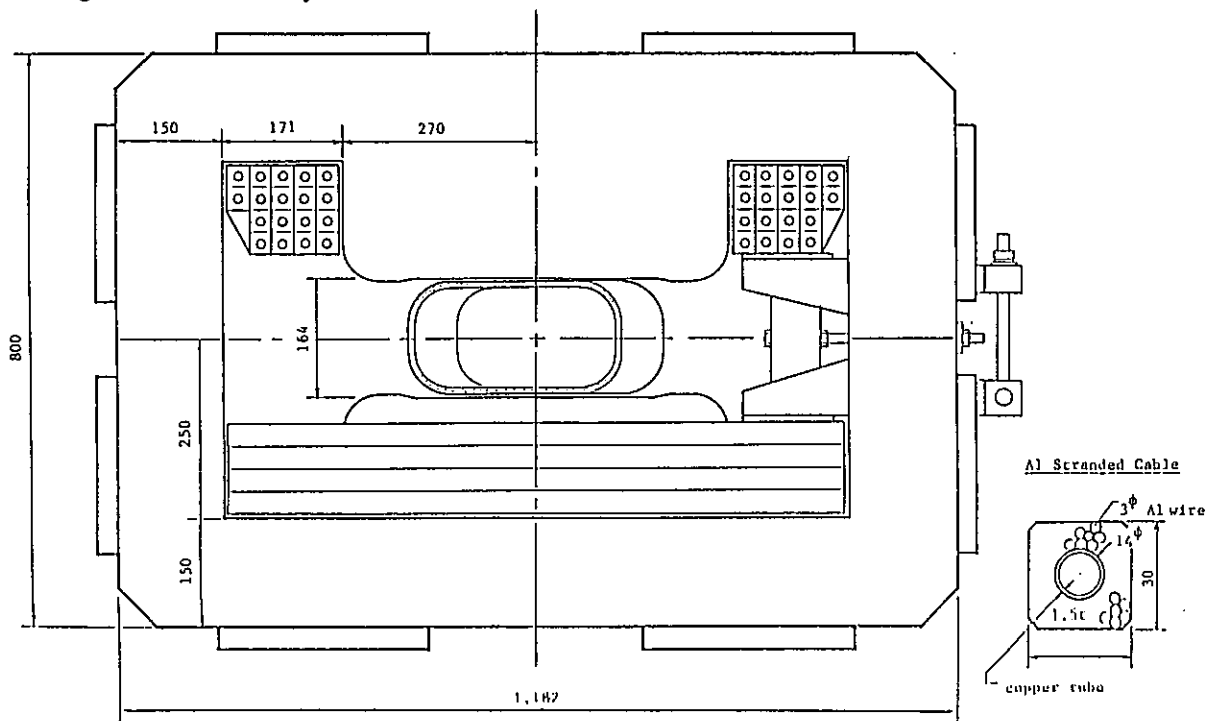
Cross sectional view of Proto-type magnet for GEMINI
